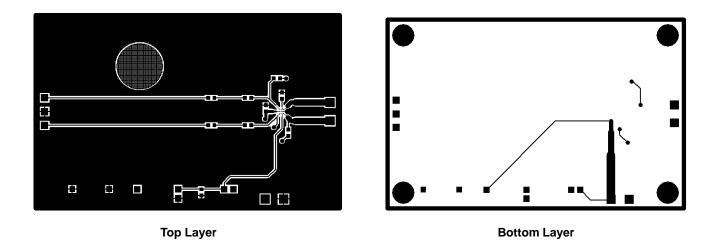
Demonstration Board for 9–Pin Flip–Chip CSP Device – PCB Layers
